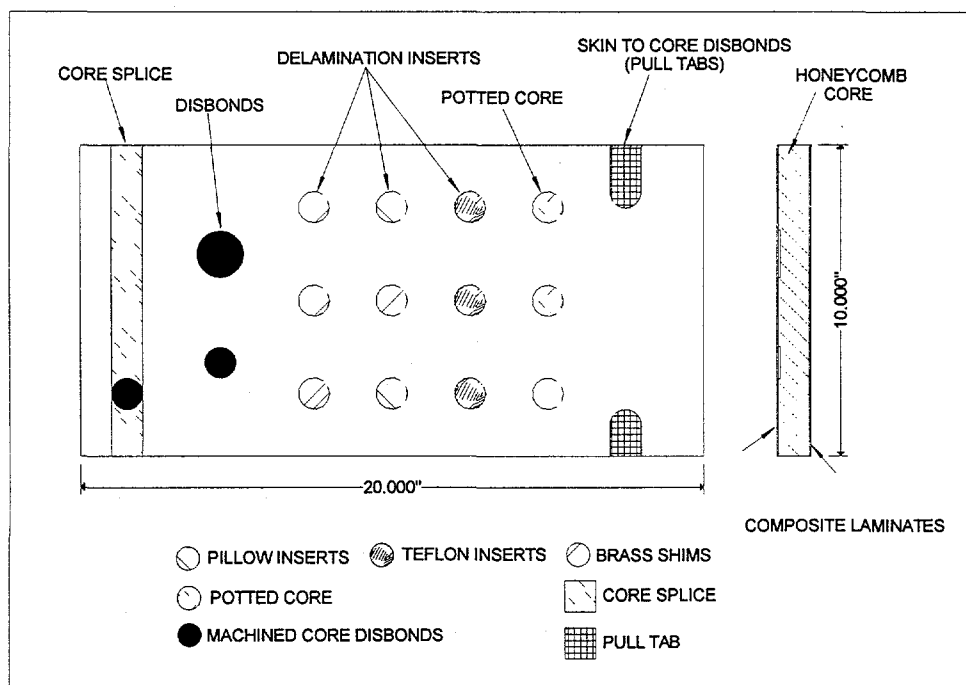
Engineering Drawing to Evaluate Honeycomb Reference Standard Design and Fabrication
